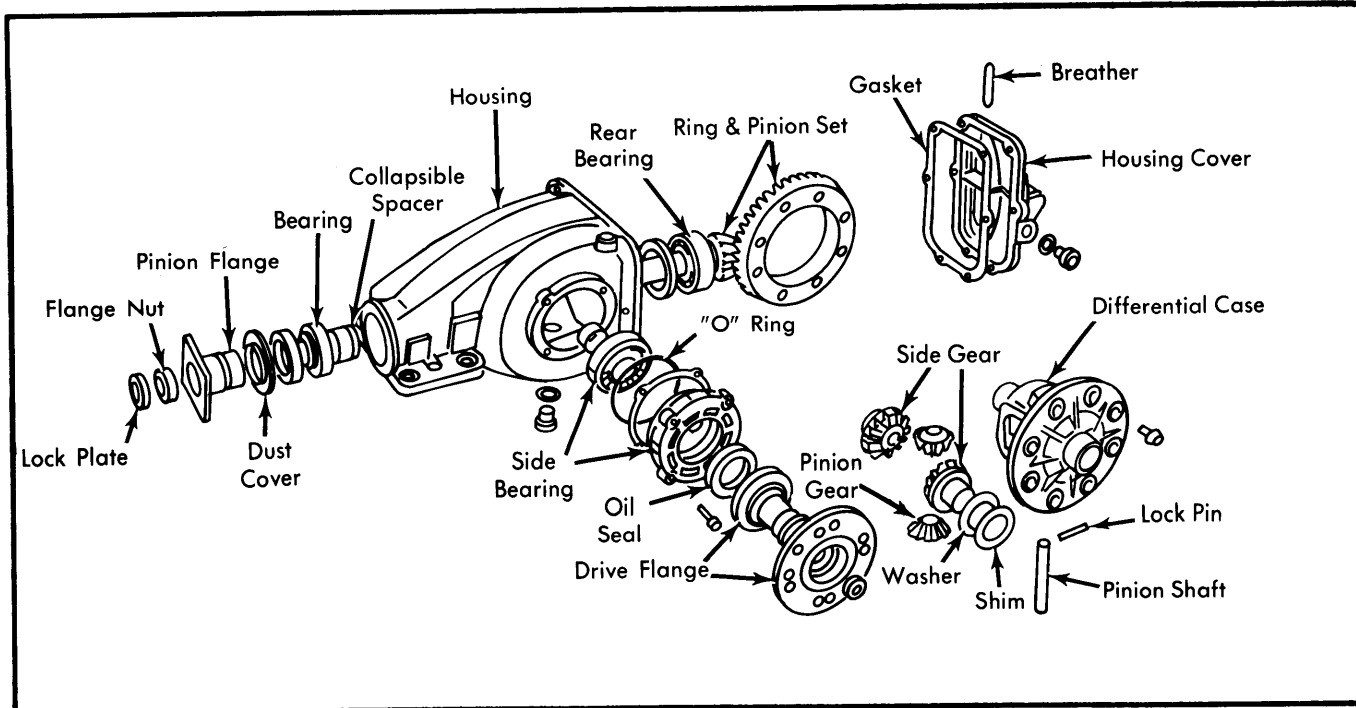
Exploded View of BMW 320i Final Drive Assembly
